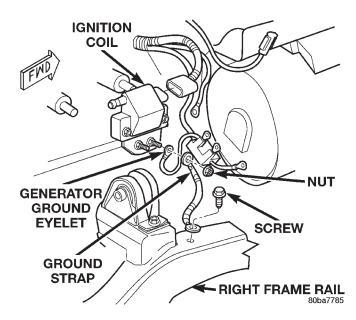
Engine-To-Frame Ground Strap Remove/ Install - 4.0L Engine
